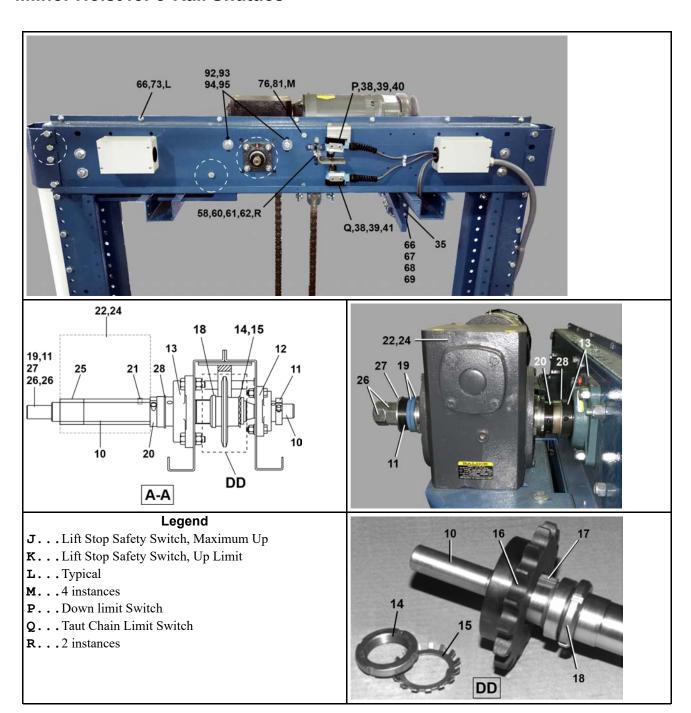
Milnor Hoist with Helical Gear Reducer for Extra Heavy Loads
